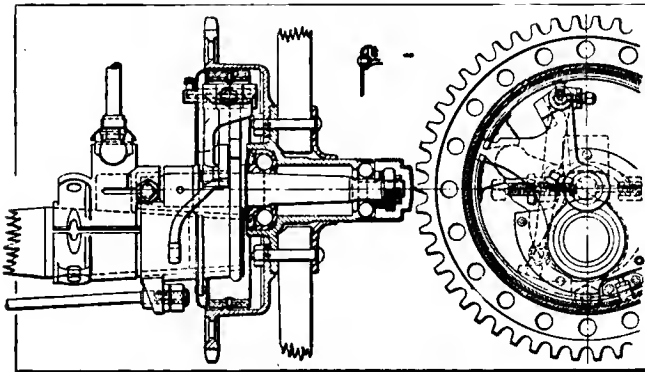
Rear wheel, sprockets, brakedrum, showing ball bearings, and system of protection against silt of the road
